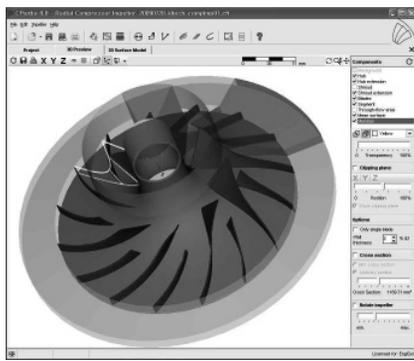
One-click automatic full 3-dimensional impeller design with CFTurbo default settings.
